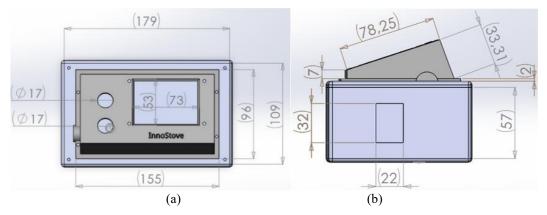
Mechanical Box Design: a) Front View, b) Side View
